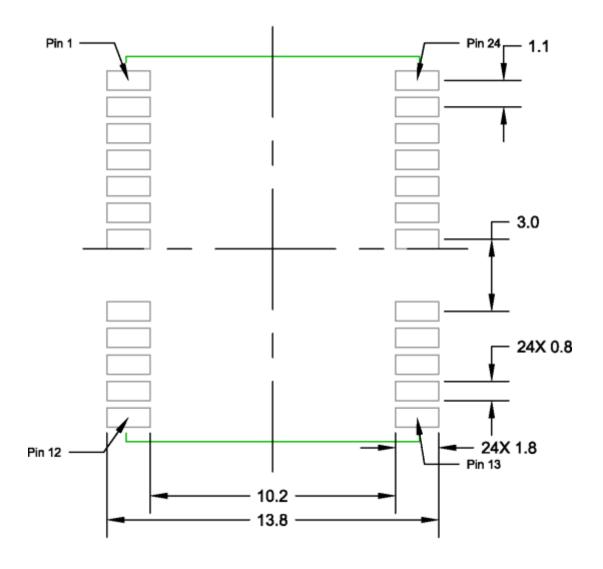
SL869 V2 and SL869 V2S PCB Footprint
